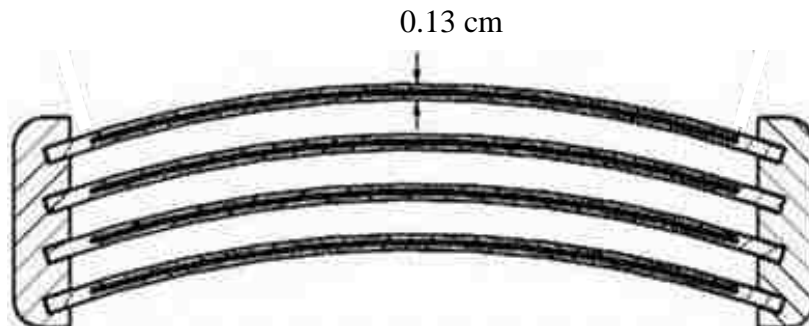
Schematic of the AFIP-7 fuel assembly.
